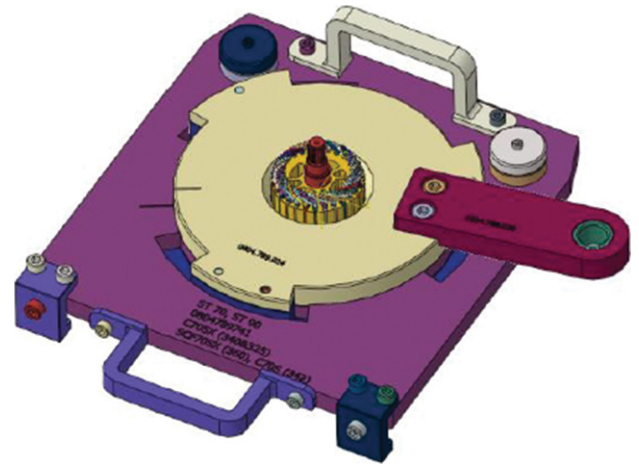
Traditionally manufactured cast metal IRIS tool (cream and maroon parts) inside its assembly
